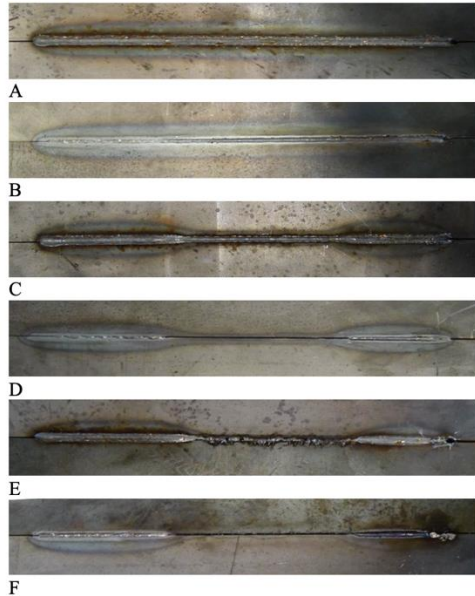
WELD PROFILES; A- 100% WELDING POWER TOP FACE, B- 100% WELDING POWER BOTTOM FACE, C- 50% WELDING POWER TOP FACE, D- 50% WELDING POWER BOTTOM FACE, E- 30% WELDING POWER TOP FACE, F- 30% WELDING POWER BOTTOM FACE
